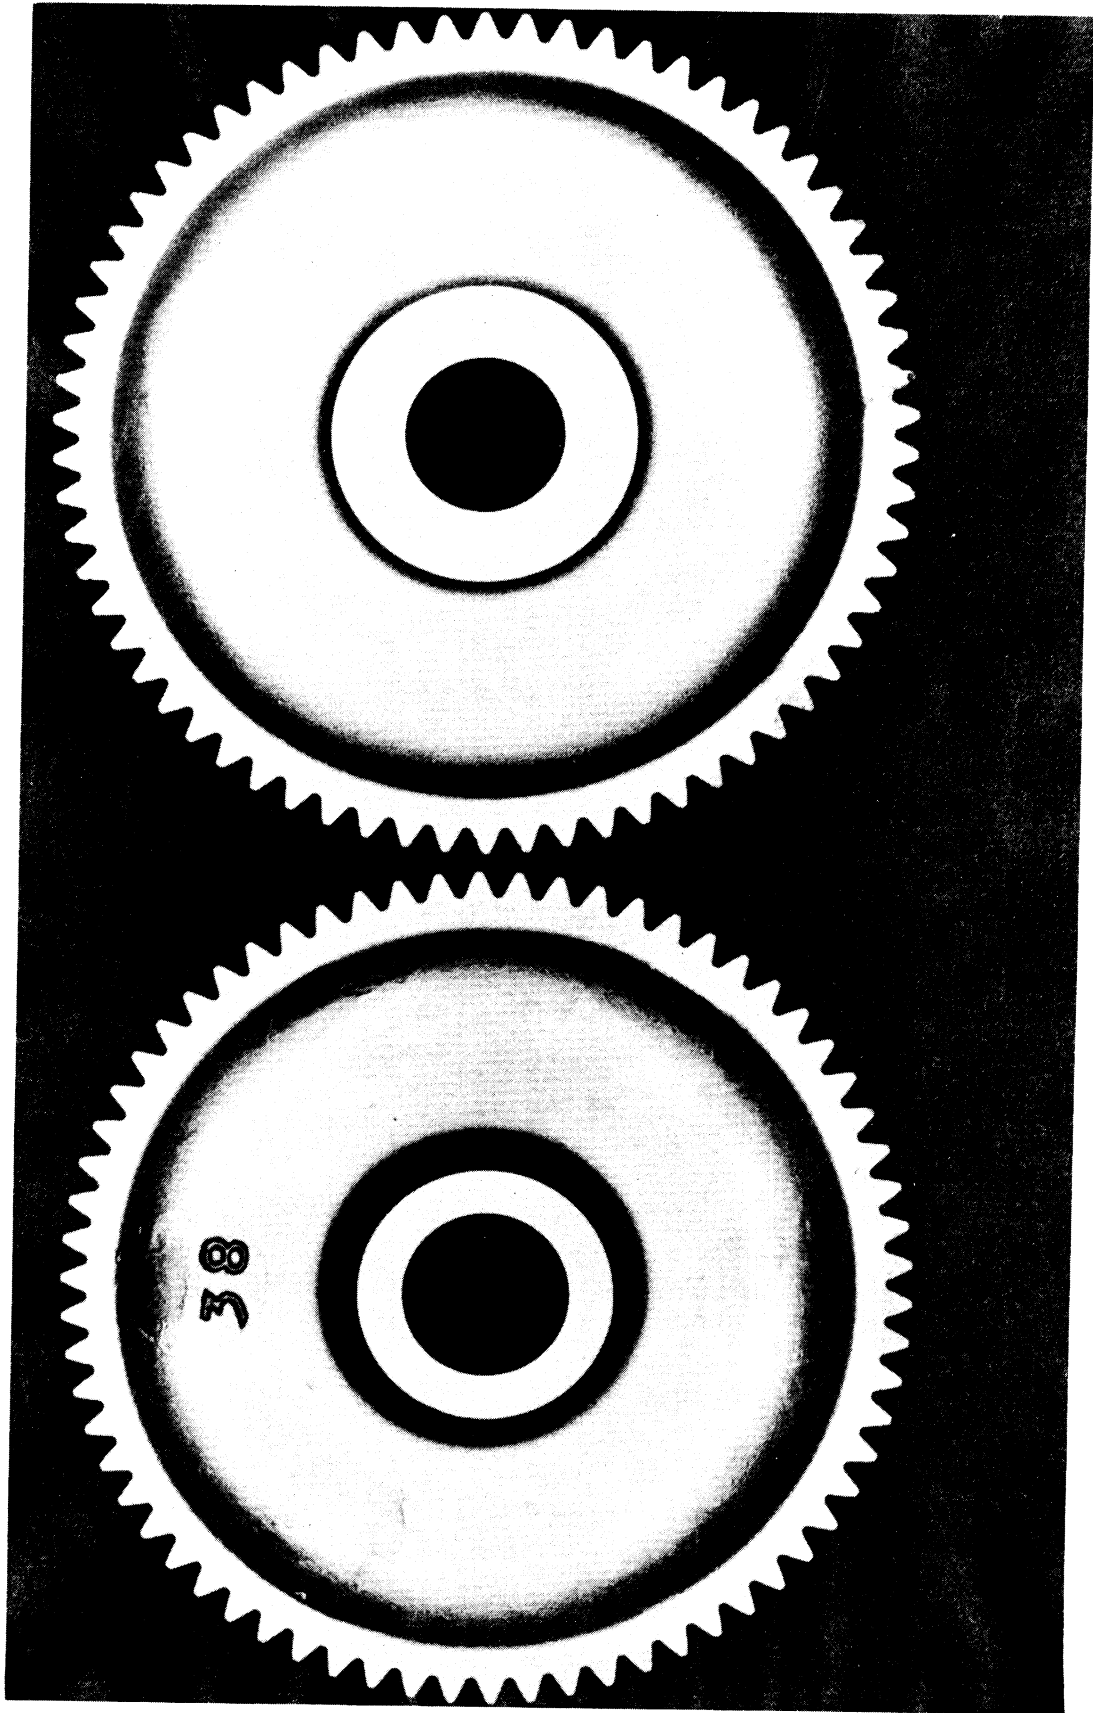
Precision cast AISI 1062 final drive gear, Part No. 7364141.
